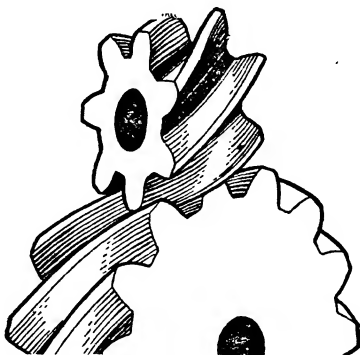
When two non-parallel shafts are to be driven, spiral gears are used.
